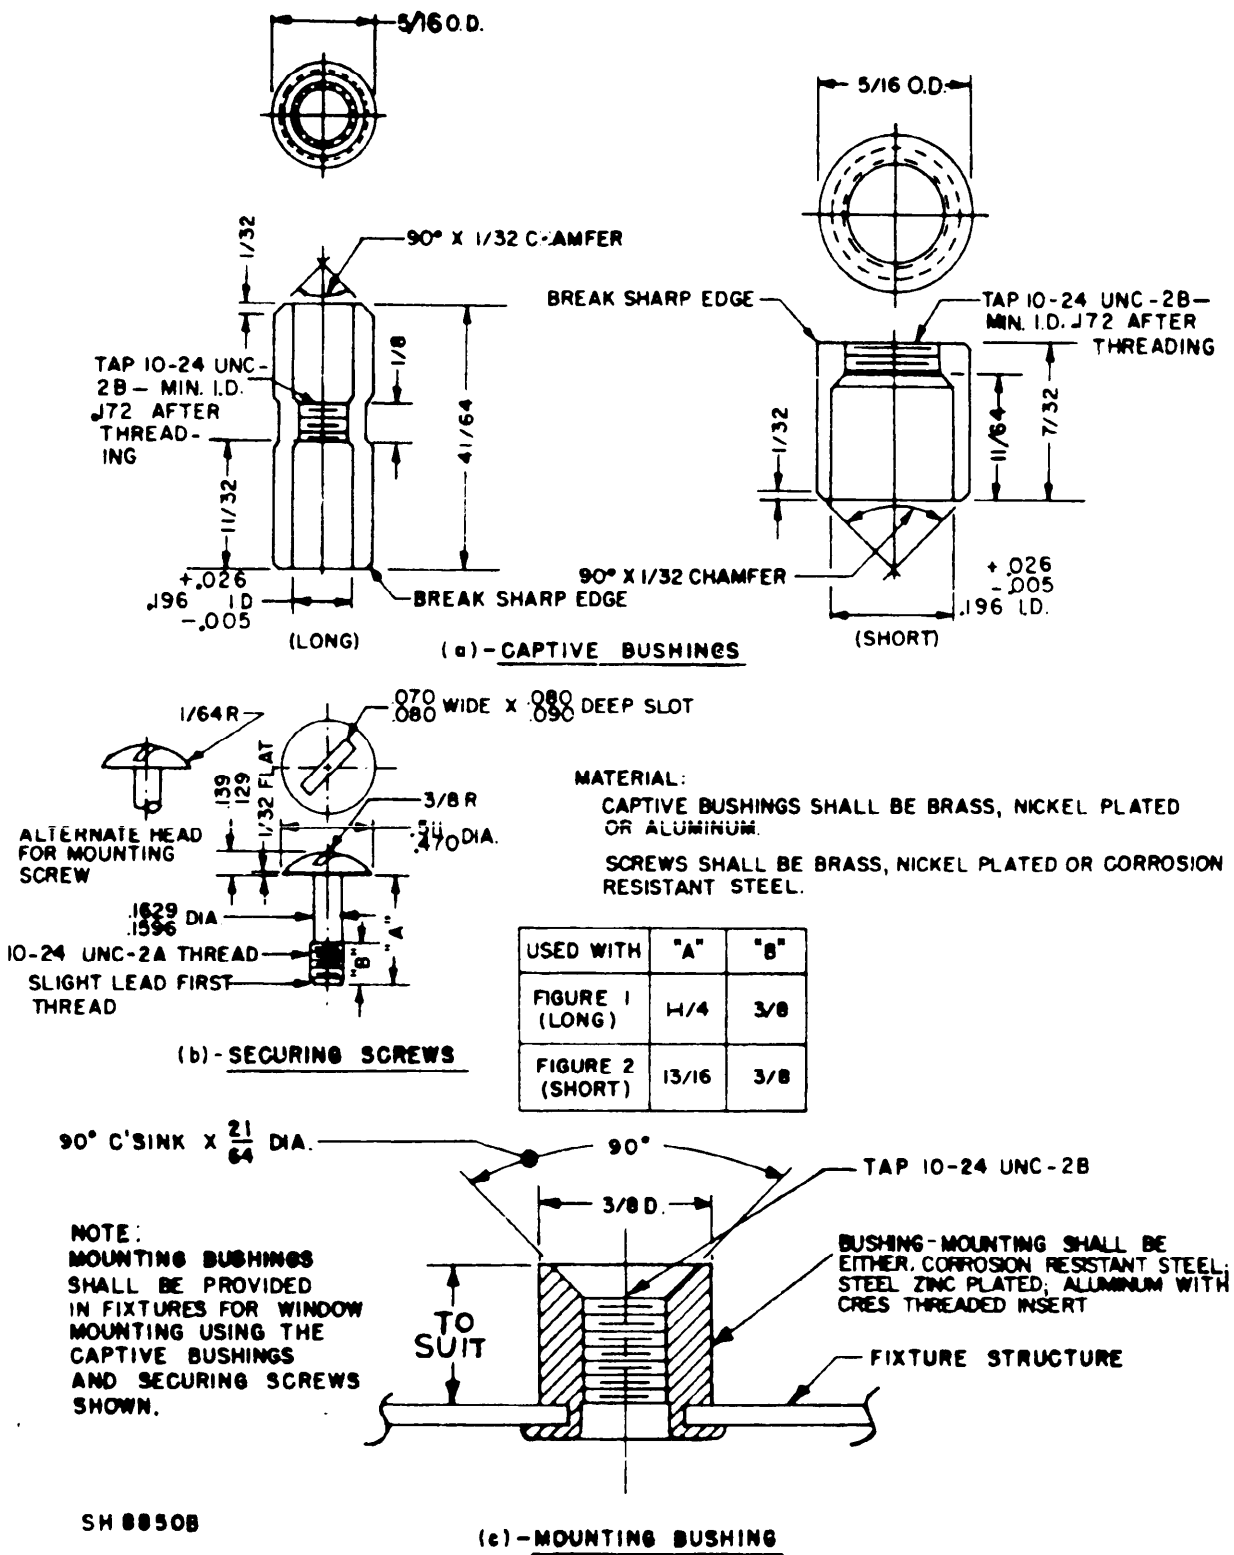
Captive bushings, securing screws and mounting bushings.
